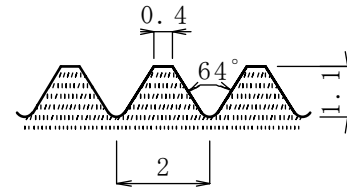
Shape of thread cut at end of HPB (Unit: mm)
